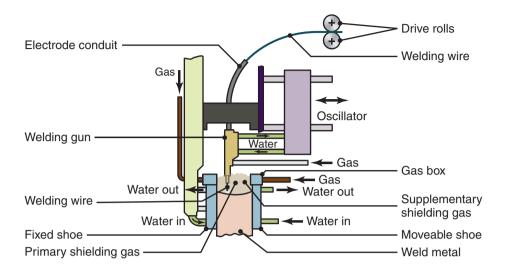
Schematic illustration of the electrogas-welding process.
